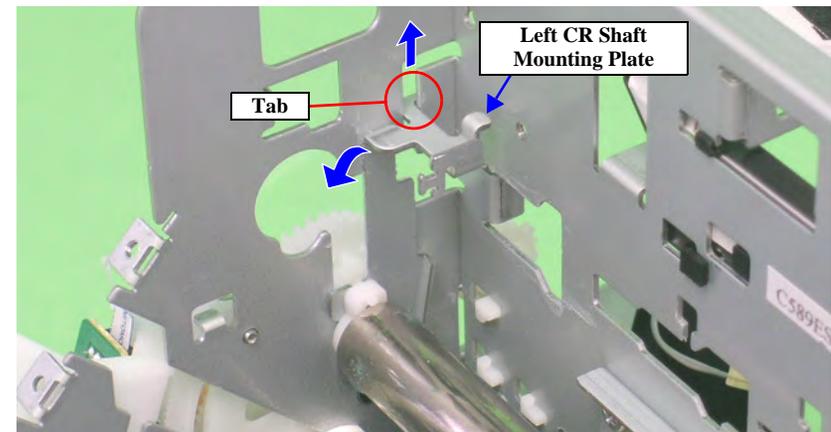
Rotating the Left CR Shaft Mounting Plate
